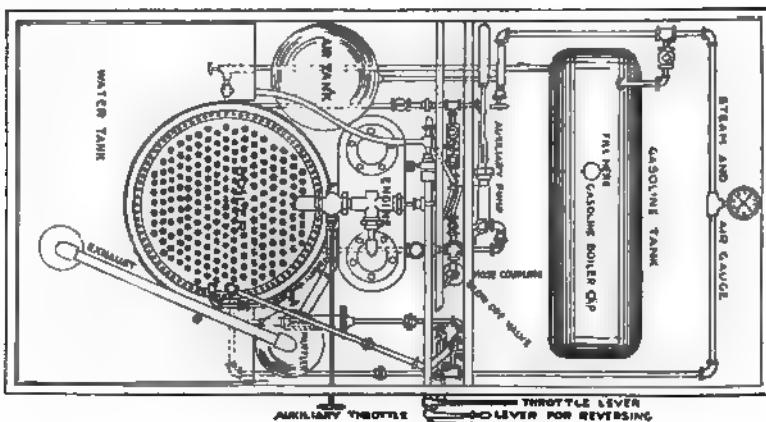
Plan Arrangement of the "Locomobile" Steam Carriage, showing position of the parts indicated in Fig. 245.
